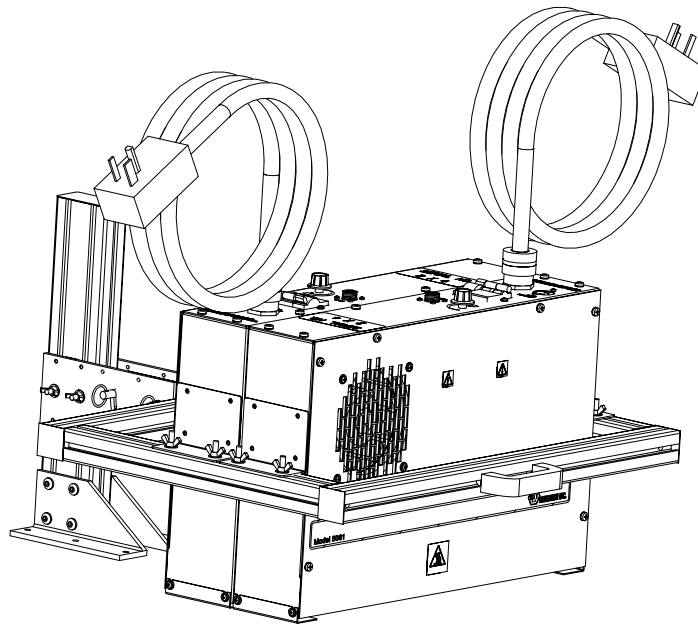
Mounting the Model 5061 Dual Heater Module System.
